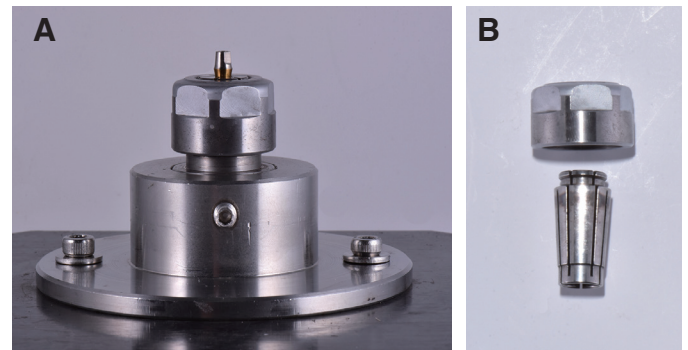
(A) Implant-abutment assembly was clamped into implant holder. (B) Detailed internal structure of clamping tool (Nut, Collet).
